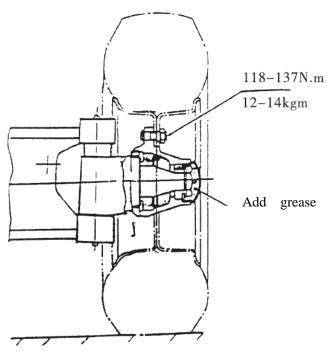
Fill lubricating grease and pre-load adjustment
